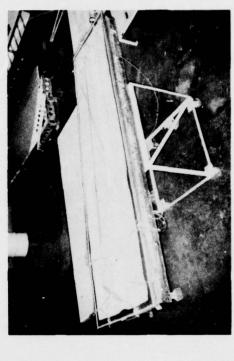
BAGGED PART AND SPECIMENS, READY FOR CURE
